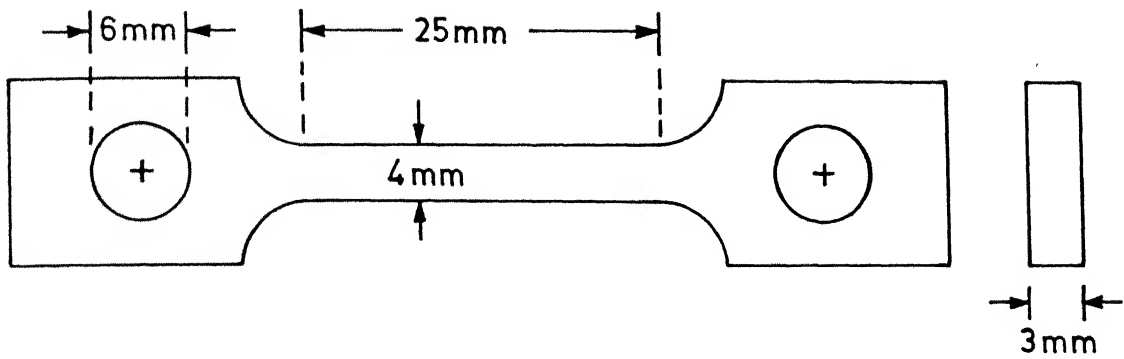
Profile and dimensions of direct tensile test specimen.
